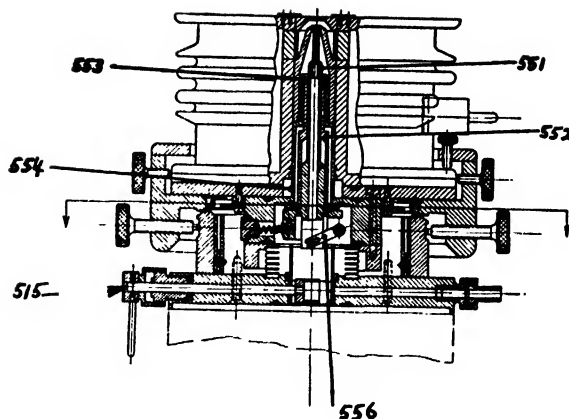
Cross-sectional drawing of the intermediate alignment section with the adjustable objective aperture.
